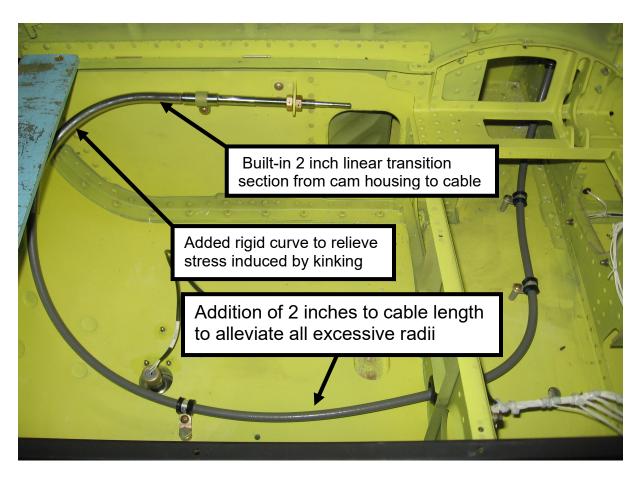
Throttle Cable Assembly 1608750-001 Design Improvements (206L4 Installation Shown as Reference)
